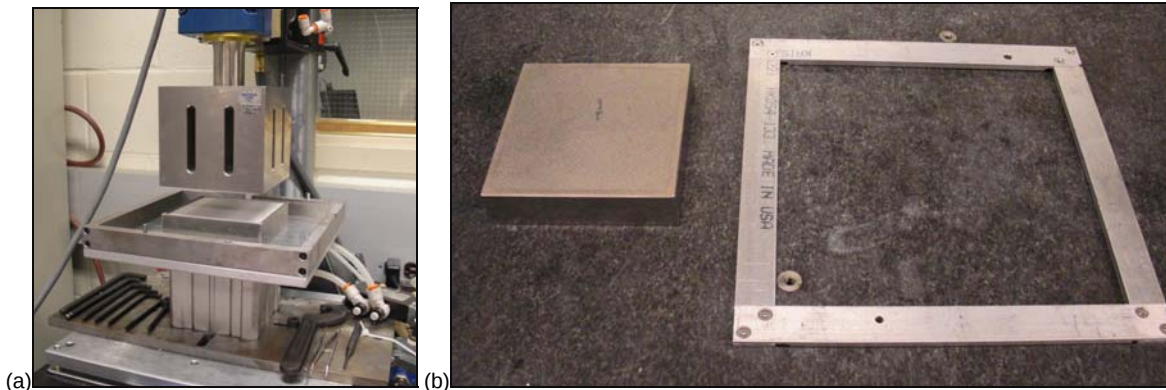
(a) Ultrasonic welder with welding anvil installed and (b) A1 sealing anvil and welding spacer
